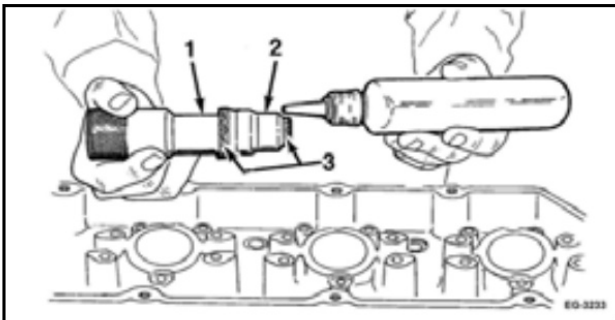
Preparing the Fuel Injector Sleeve for Installation
